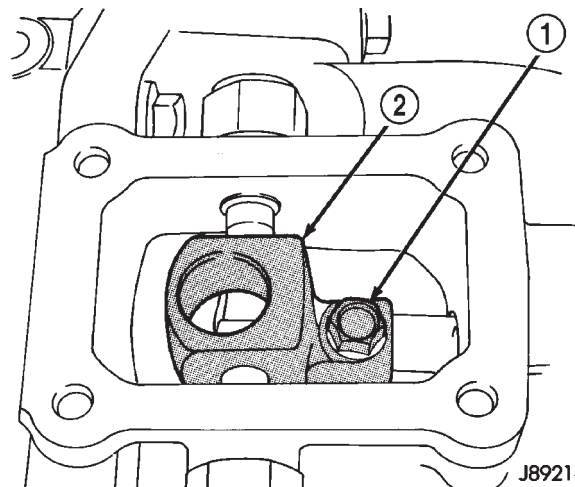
Position Shift Arm in Adapter or Extension Housing
